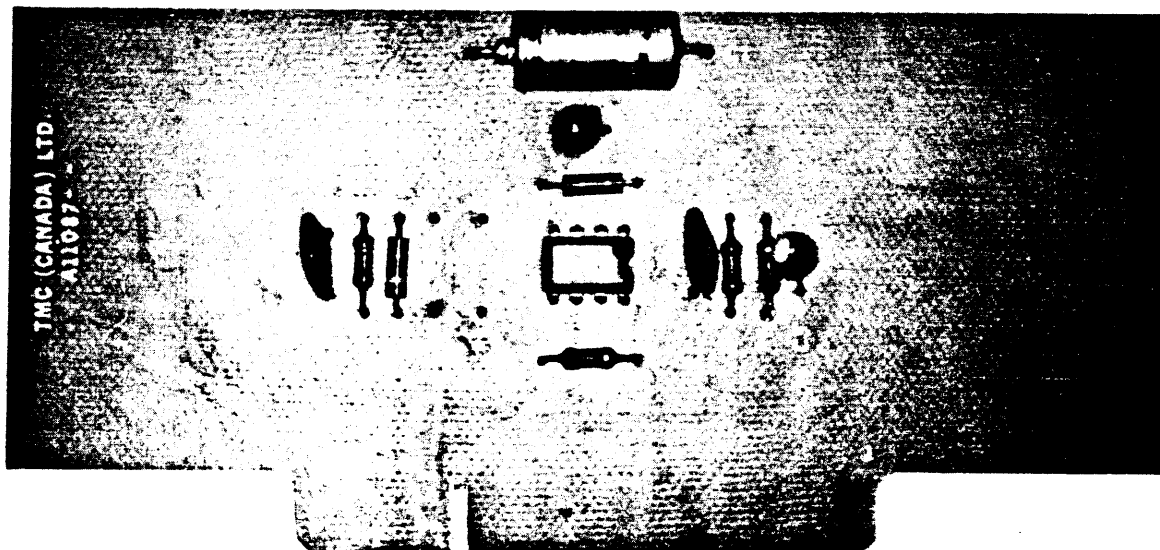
VARIABLE TONE GENERATOR ASSEMBLY A11087-5
